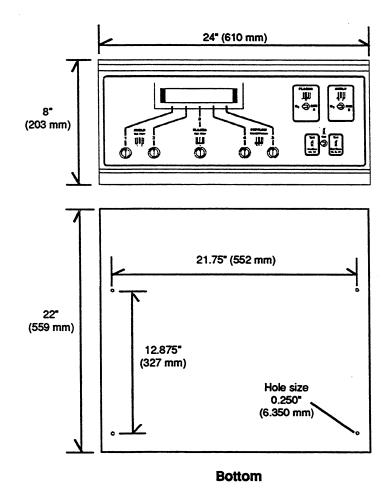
Automatic Gas Console Removal Procedure and Mounting Dimensions
